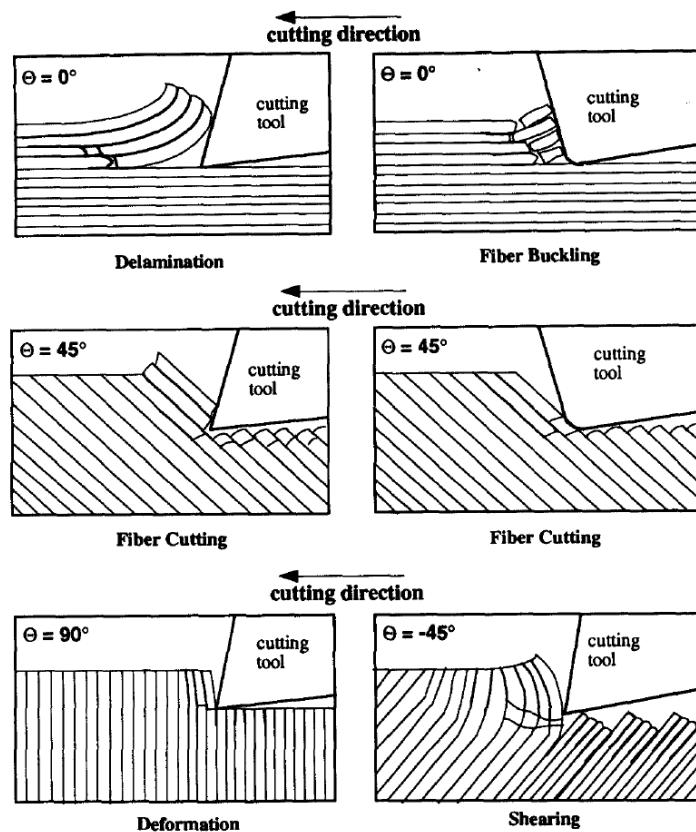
Cutting mechanisms in orthogonal machining of Gr/Ep [14].
